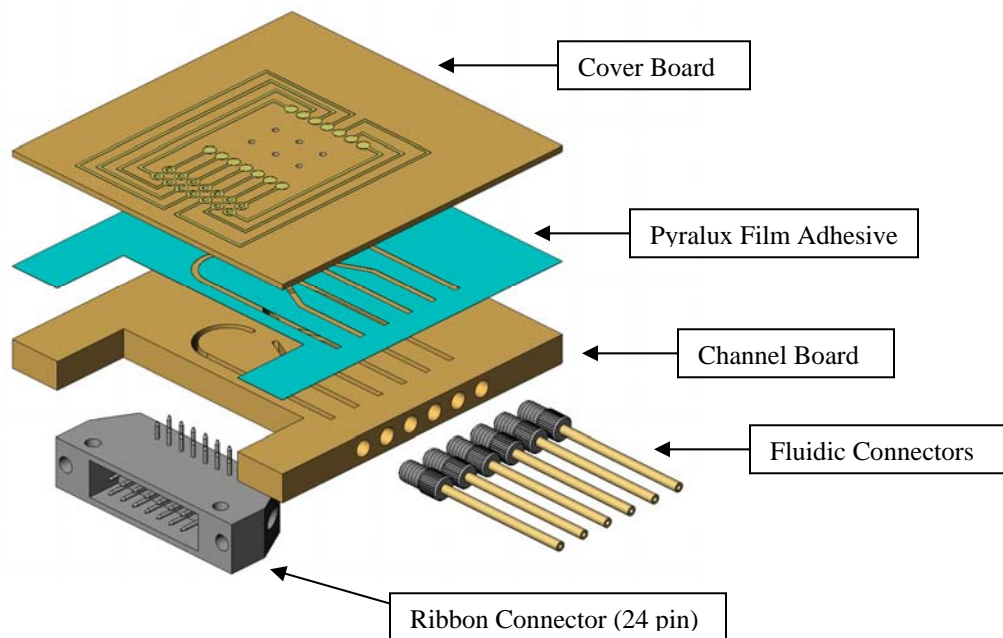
Exploded view of Fluidic Printed Wiring Board (FPWB) with a standard 24 pin electrical connector and six #6-40 Upchurch Scientific fluidic connectors.
